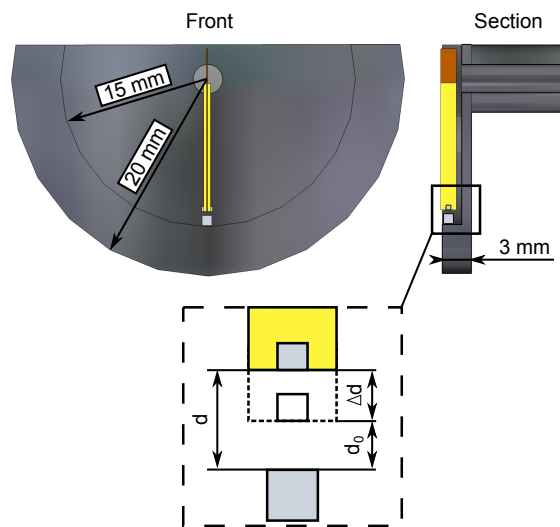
Front and section view of the rotational harvester showing the arrangement of the magnets
